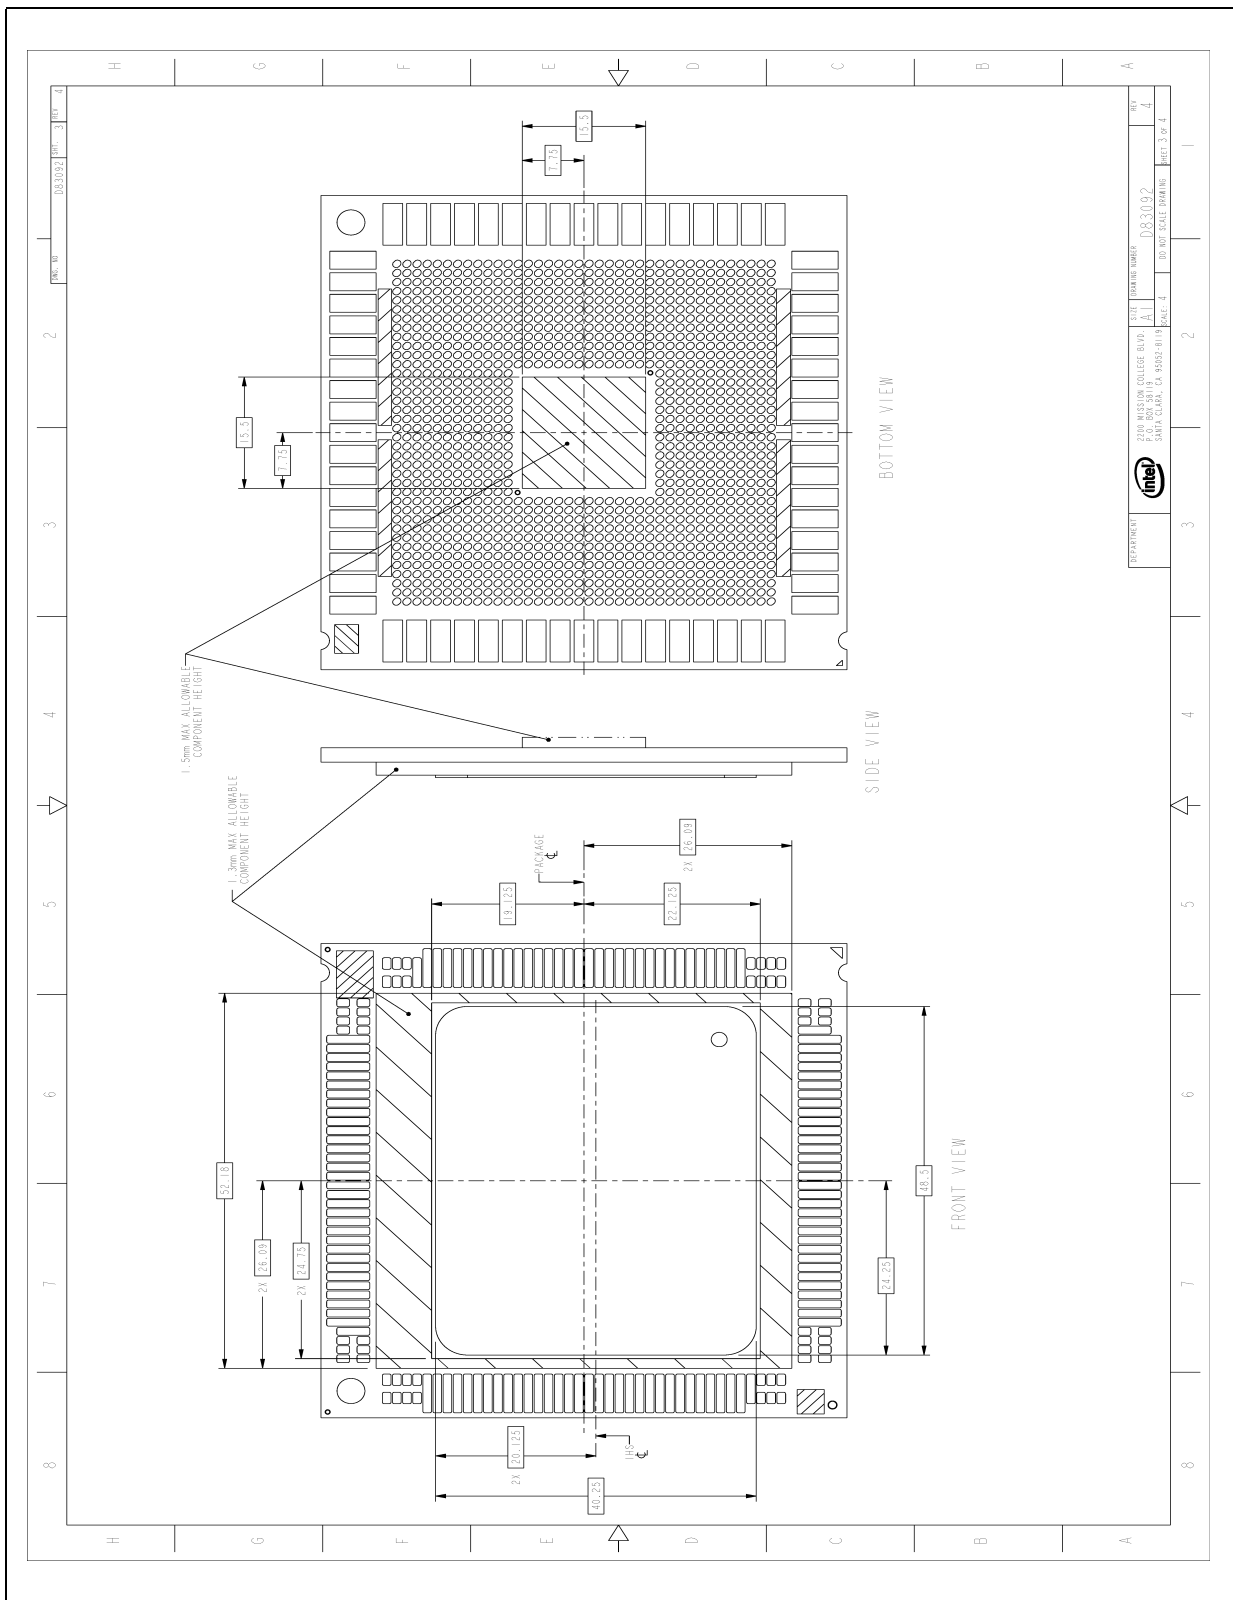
Intel® Itanium® Processor 9300 Series Package Drawing (Sheet 4 of 4)
